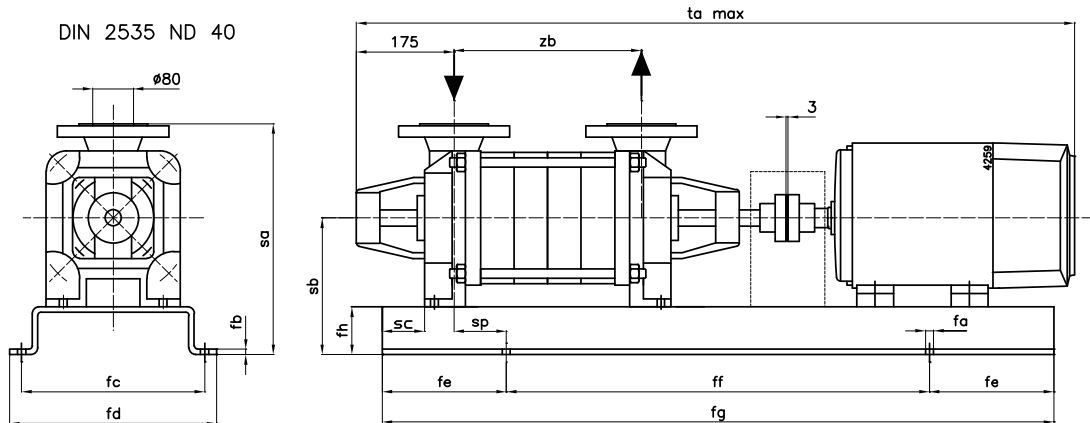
Dimensions sketch unit MCHZ(S) 20b.
